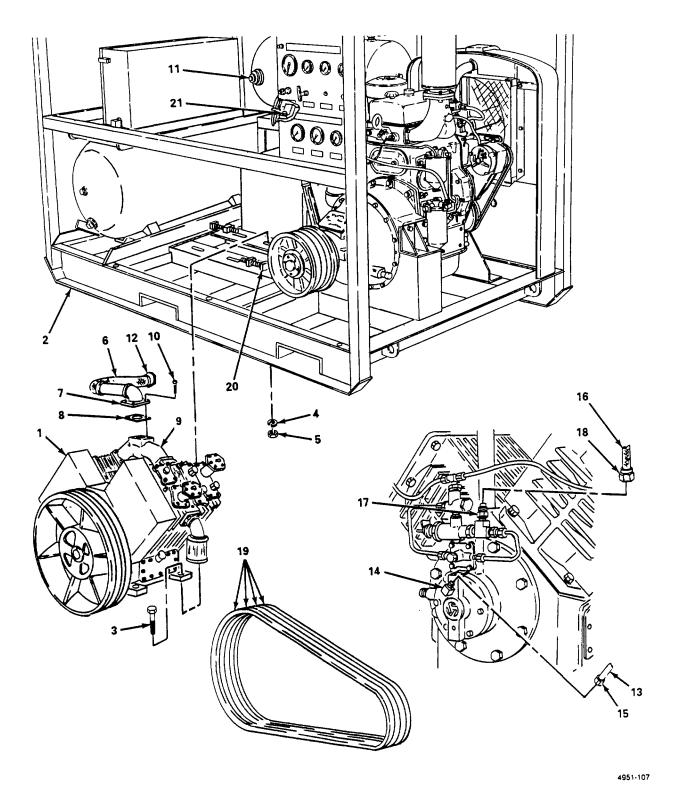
Air Compressor, Installation (Sheet 1 of 2).
